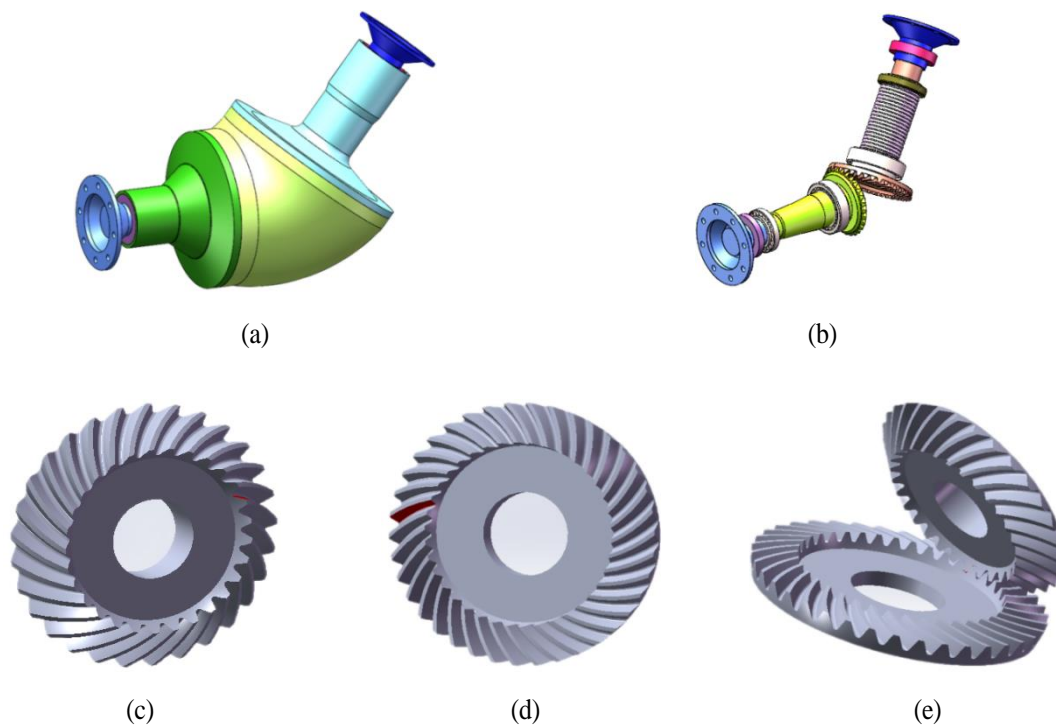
Spiral bevel gear model of helicopter intermediate reducer: (a) Overview of gear reducer; (b) Internal view of gear reducer; (c) Drive gear; (d) Passive gear; (e) Gear meshing pair
